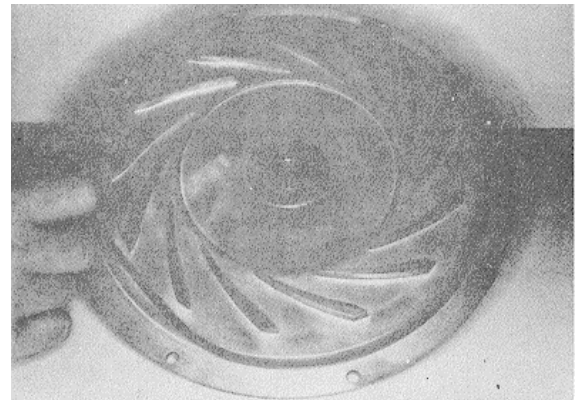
, T-539. Installing sealing ring on VT oil seal/diffuser plate
